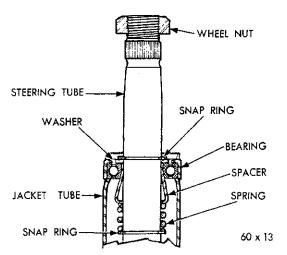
Jacket Tube Installation SC-1, SC-2, SC-3, SY-1
